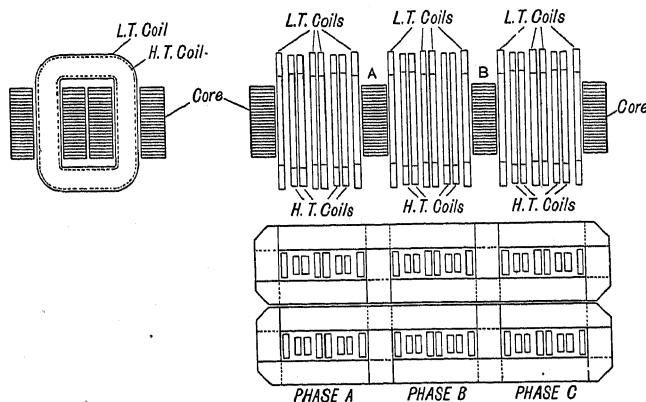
Outline of Three-phase Shell-type Transformer.
